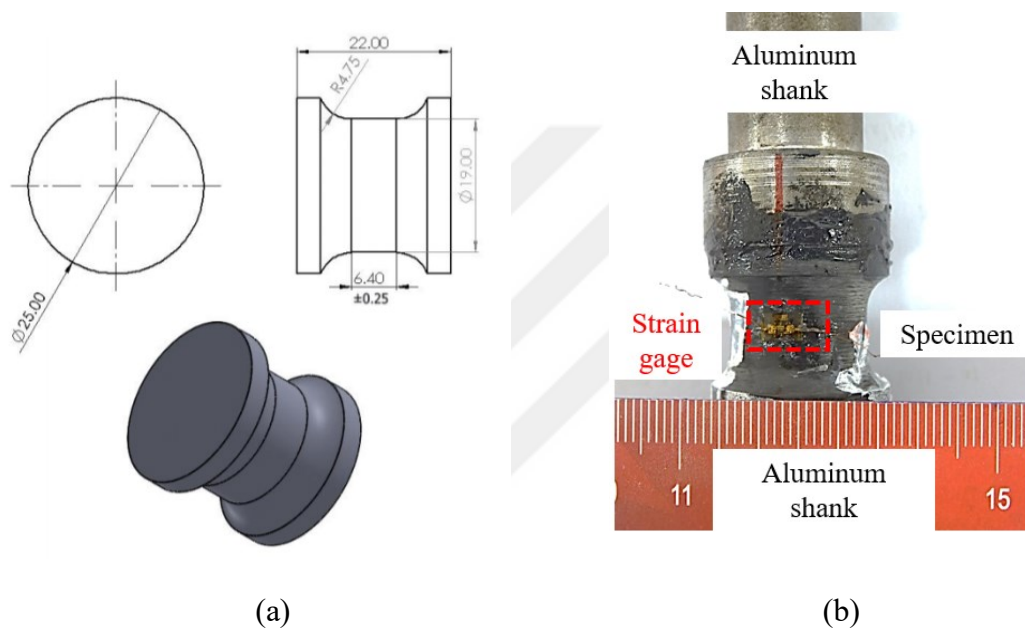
(a) Dimensions of the through-thickness tensile test specimen and (b) the specimen prepared for test
